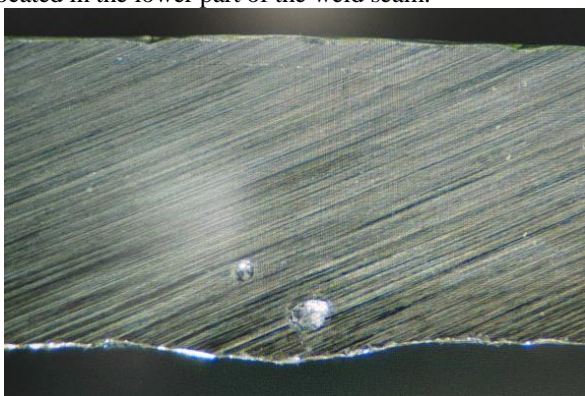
Pores inside the weld seam of the 2 mm specimen (15×)
